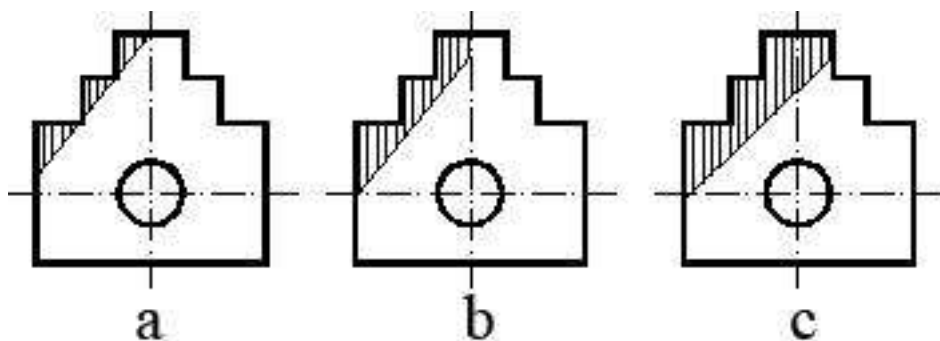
Wear diagram of hammer of fodder grinder: a – wear limit has not reached the hammer axle – hammer replacement is premature; b – wear limit has reached the hammer axle – hammer must be replaced; c – wear limit has gone beyond the hammer axle – it is too late to replace.
